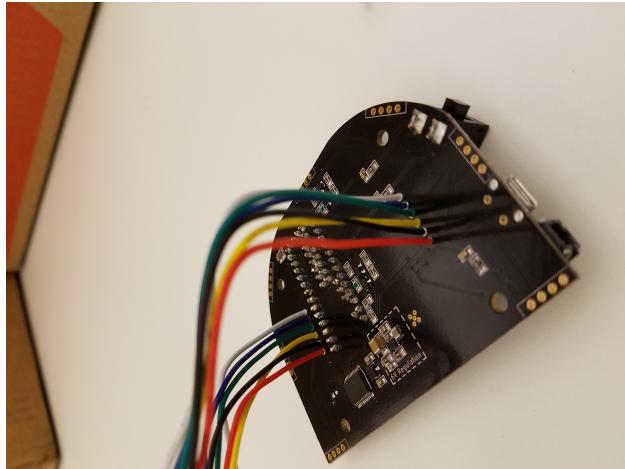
The GRITSBot X main PCB after mounting the motor leads.
